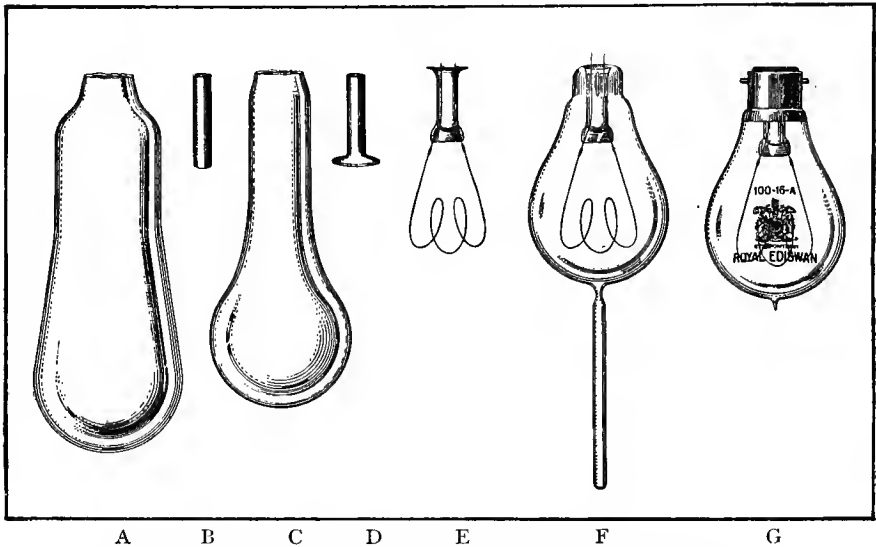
Stages in the Manufacture of a Carbon Lamp.
